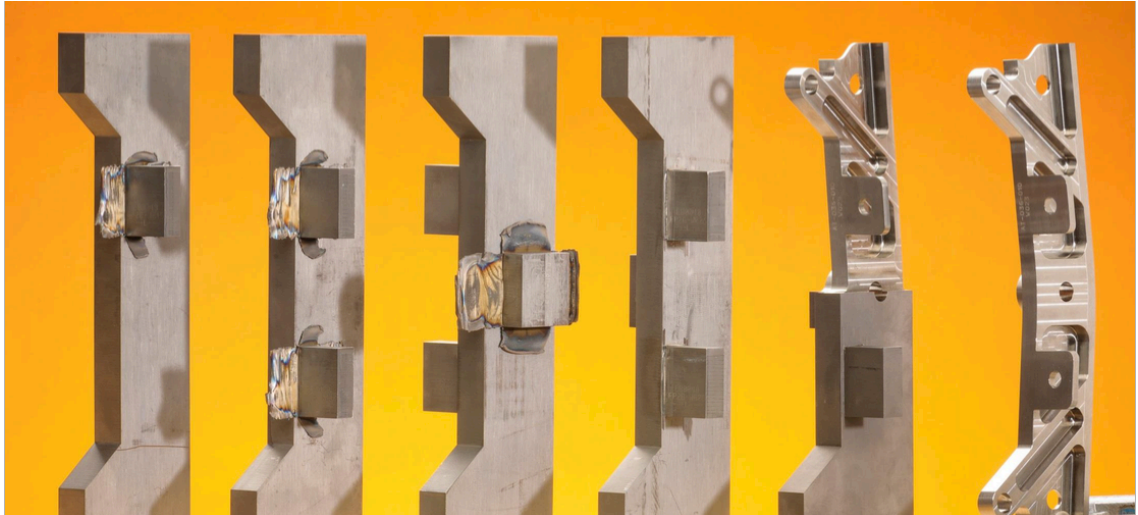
Step by step (from left to right) near-net-shape manufacturing with LFW (33)
